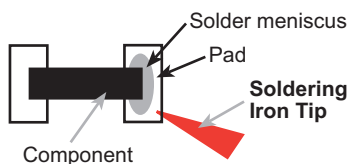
Use Soldering Iron to Heat Pad Where Shown
